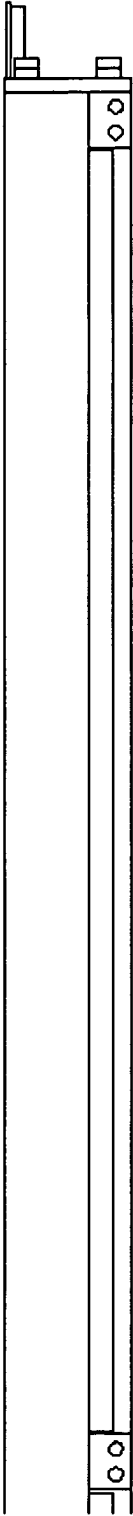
A: Front view of the left end of a ceiling frame (40 foot collapsible cargo container)
